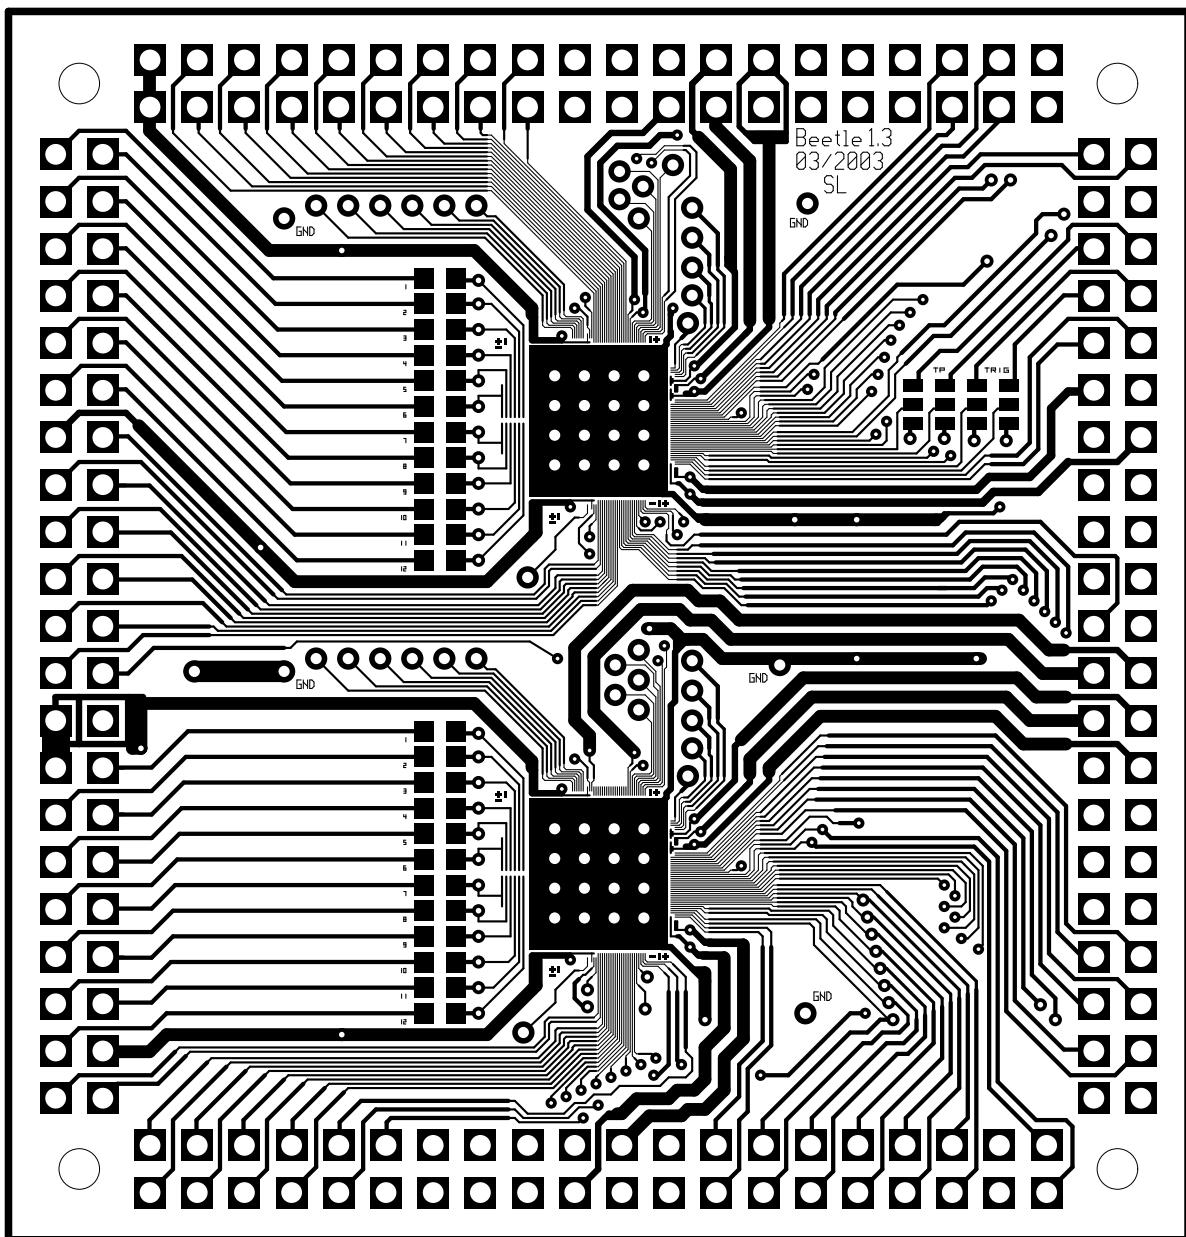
Top layer of the Heidelberg daughter PCB (version 03/2003).
